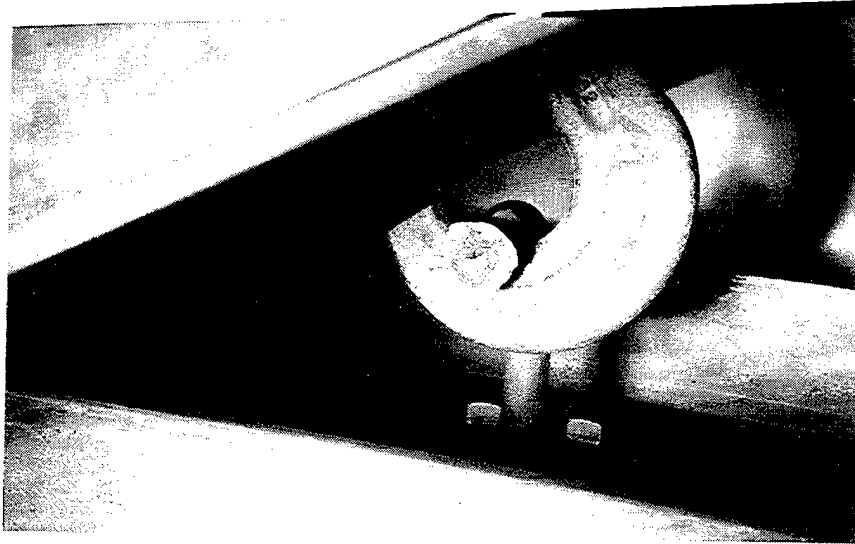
Close-up view of the failed welded end of the U-shaped bar of the third tie-down device tested after the pull test.
